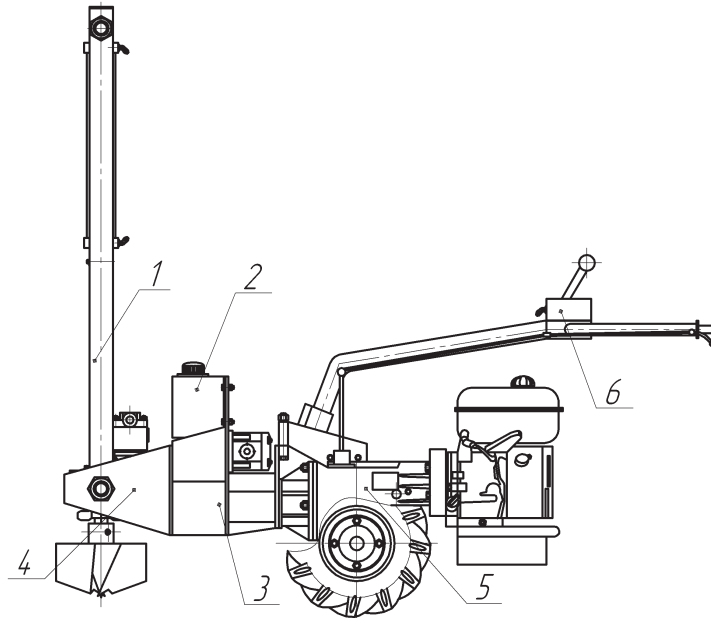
Unit for drilling with mounted equipment: 1 — drilling block, 2-hydraulic tank, 3 — frame 4 — motor-reducer, 5 — rototiller, 6 — flow control device.
